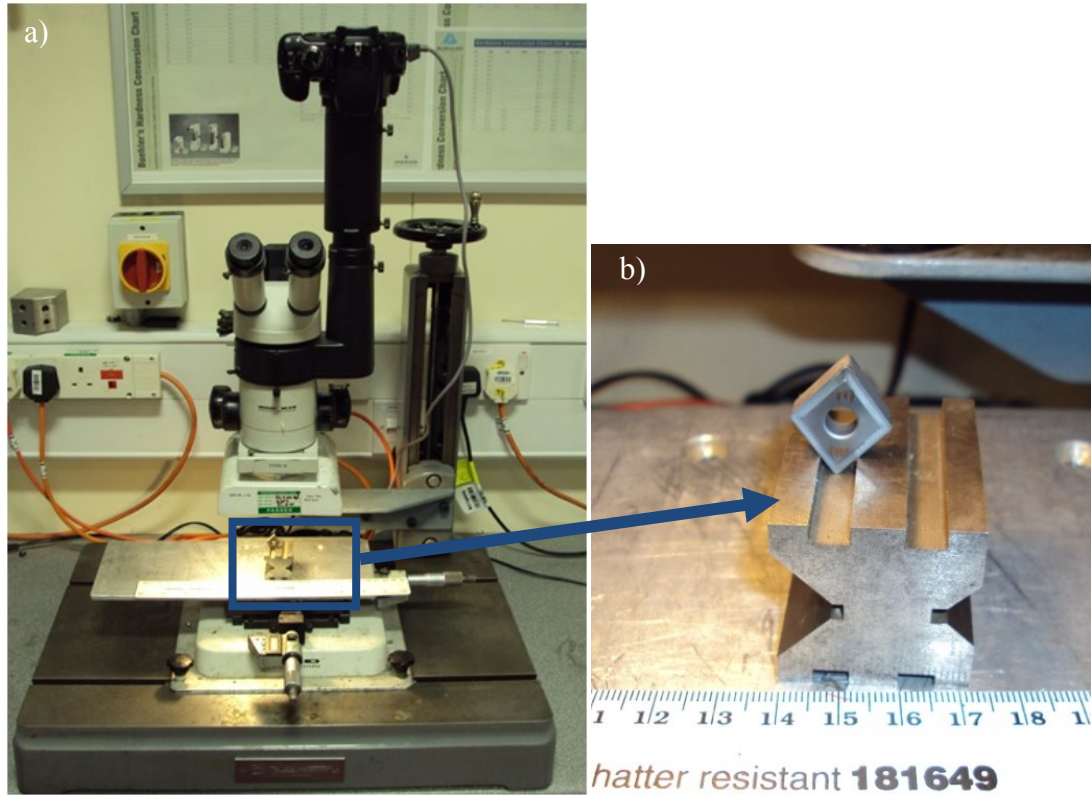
(a) Tool wear measurement set up and (b) fixture to hold the insert
